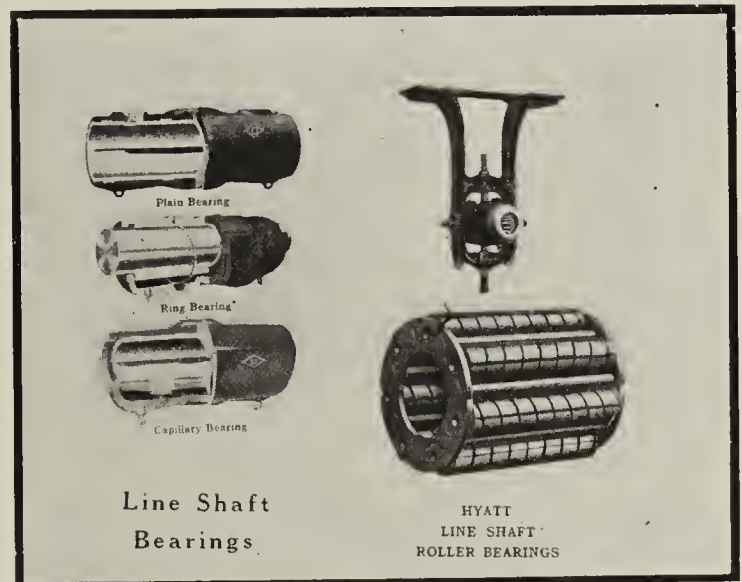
Babbitt and Roller Bearings Used on Line Shafting and Machine Bearings.
